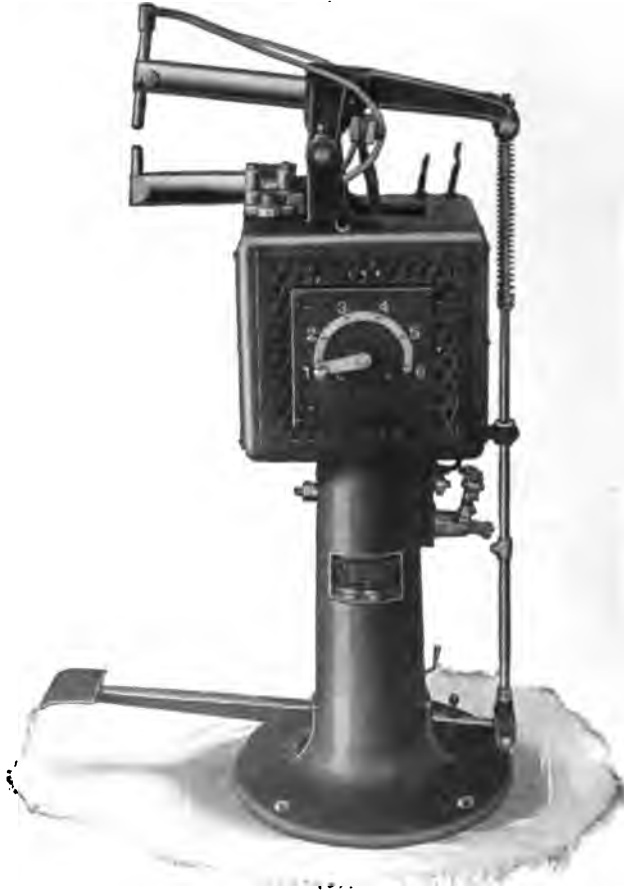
Foot-Operated Spot Welder for Sheet Metal
